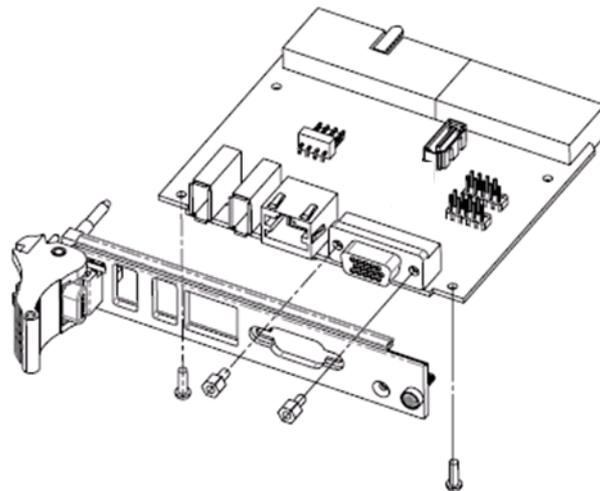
Assemble of MIC-3525 (MIC-3325 RIO)
